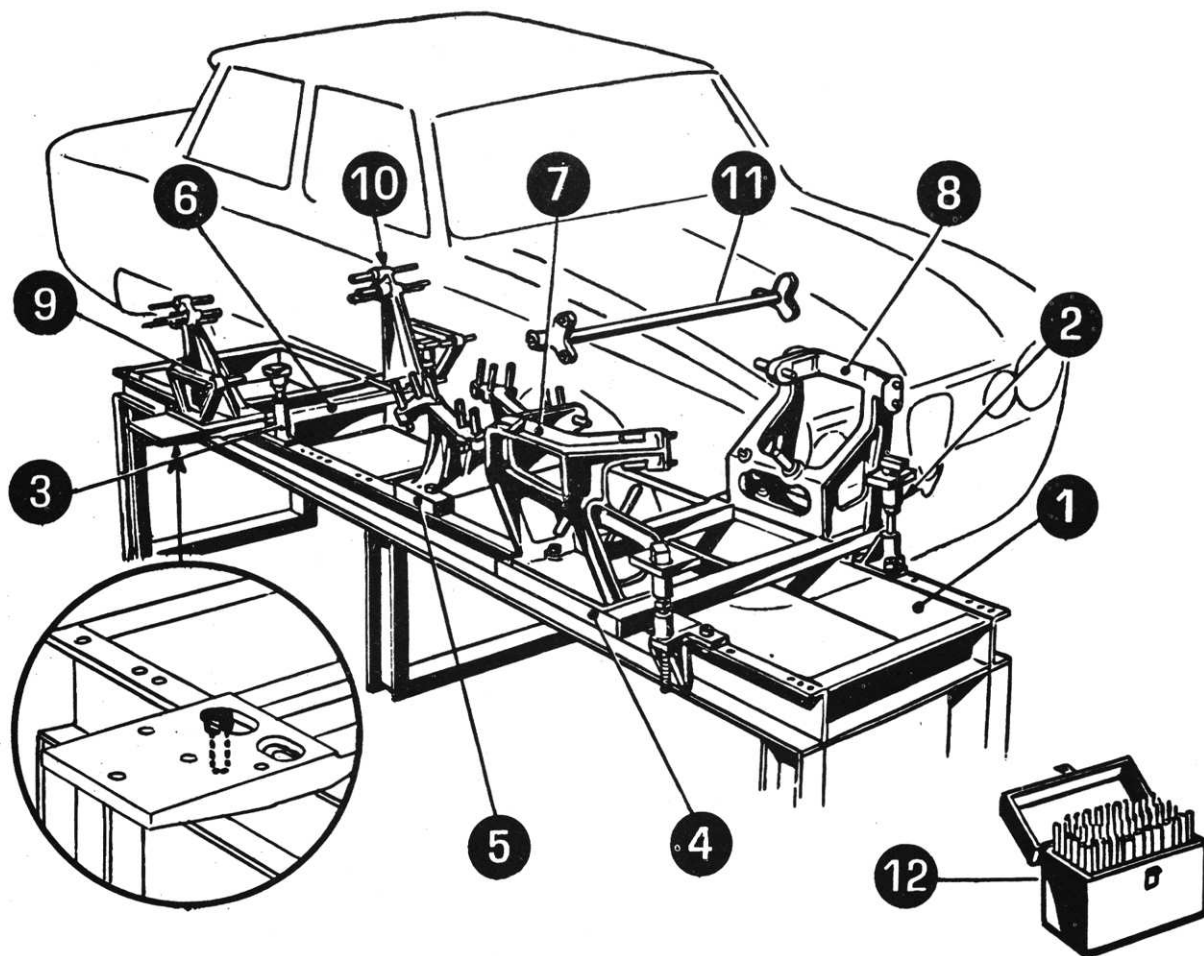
ASSEMBLY FOR CHECKING GIULIA TI AND GIULIA TI SUPER CHASSIS
